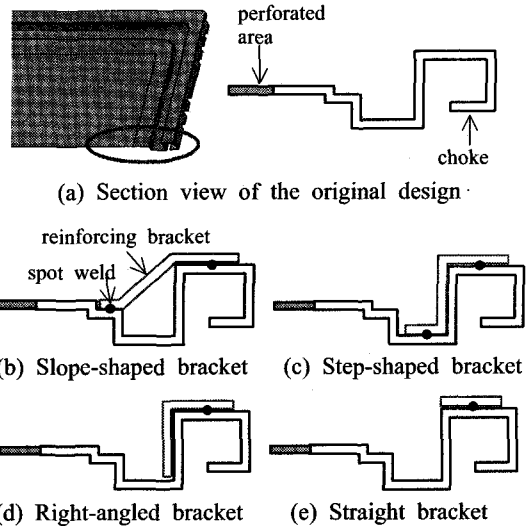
Reinforcing brackets welded to the right flange of the door frame
